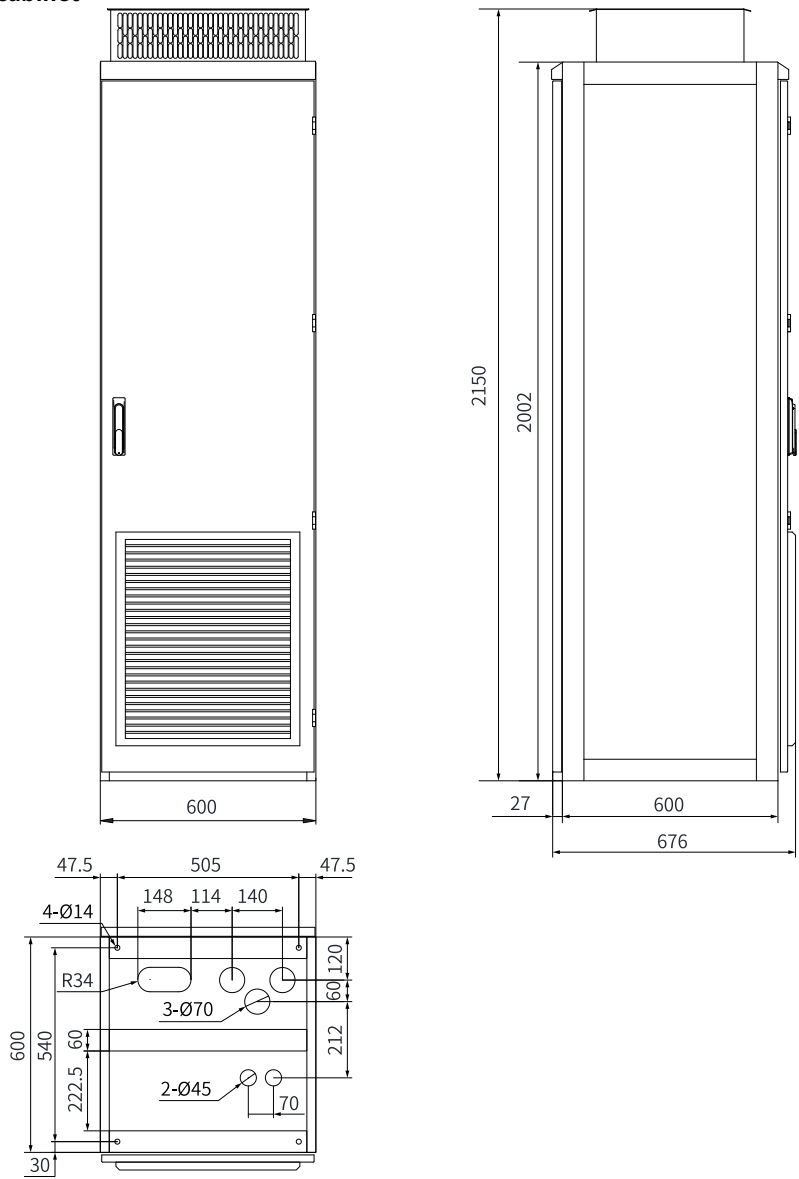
600-mm wide three-phase braking cabinet (mm)
